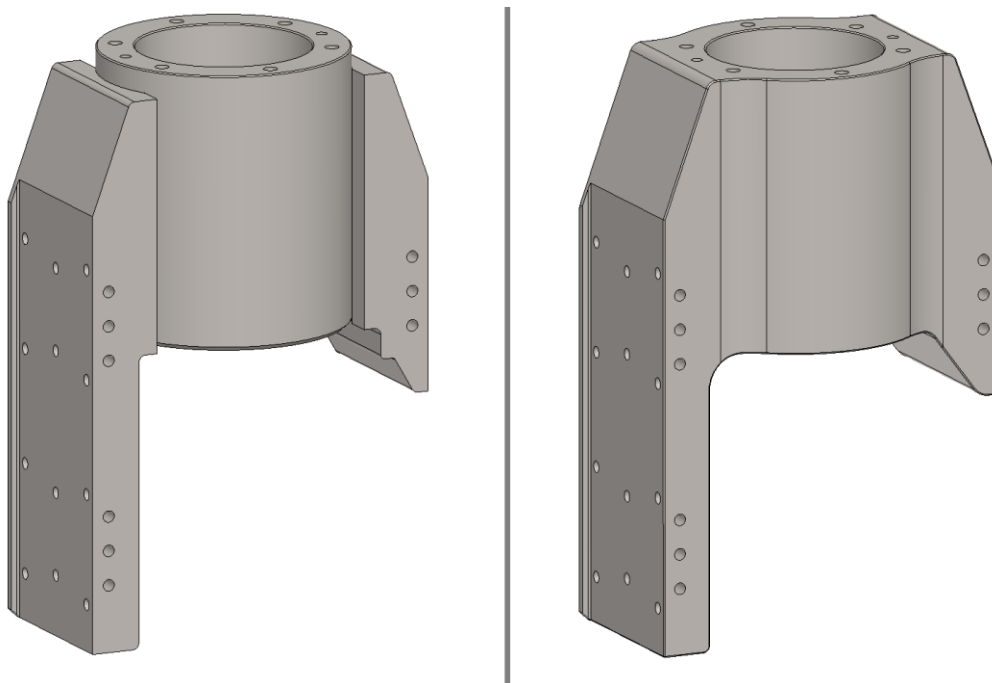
The linear actuator carriage: On the left welded model and machined on the right
